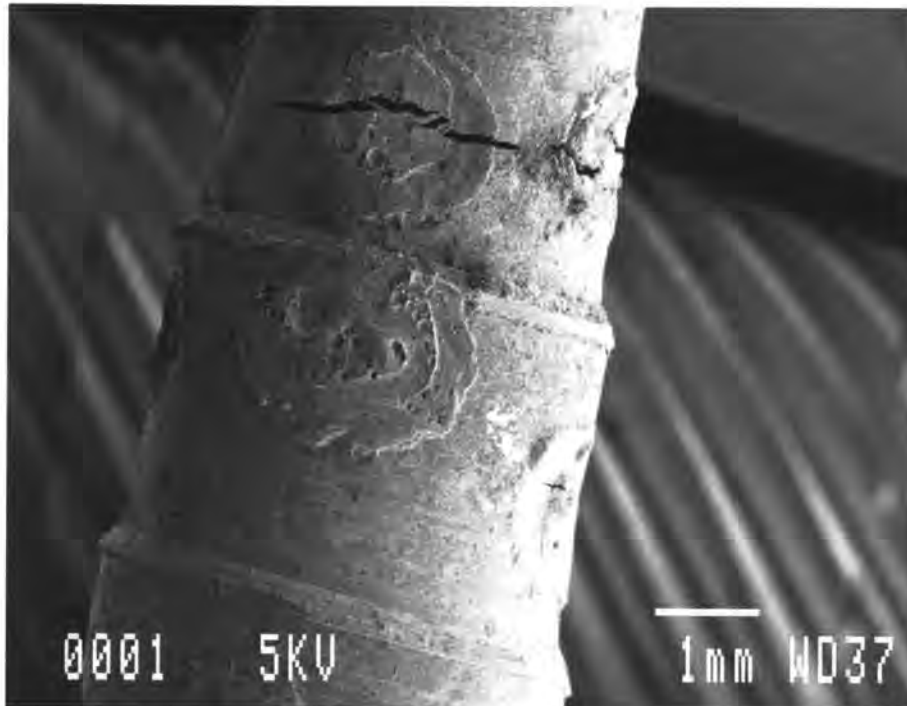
A cracked, spot-welded sample after it was exposed to a CO-CO₂-H₂O environment.
